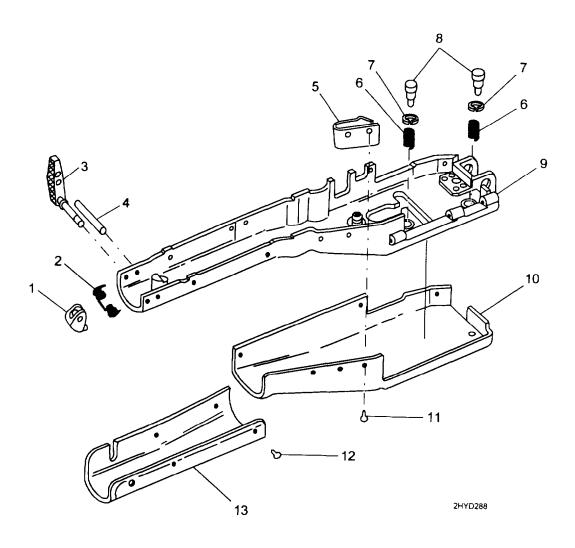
Group 0804 Cover Housing Assembly, PN 7269118
